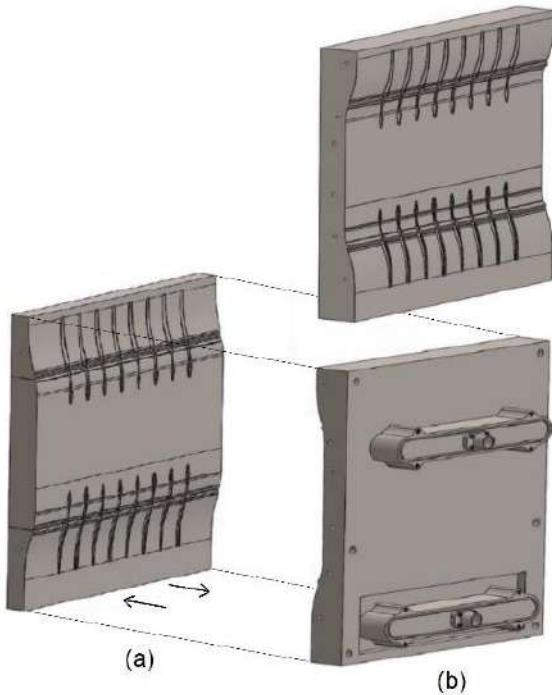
a) Front view of the core plate, b) Front and back views of the cavity plate and hot runner manifolds
